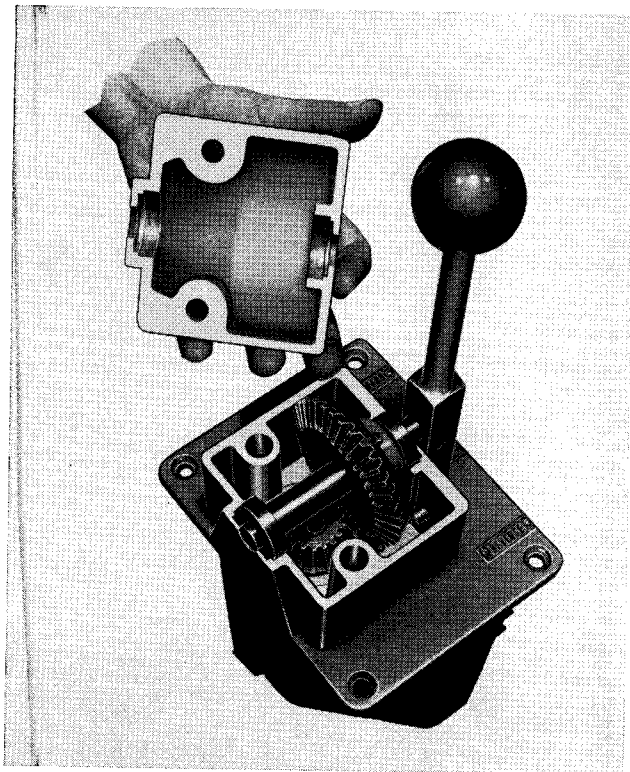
Type DM Master Switch, Top Housing Removed to Show Gearing
